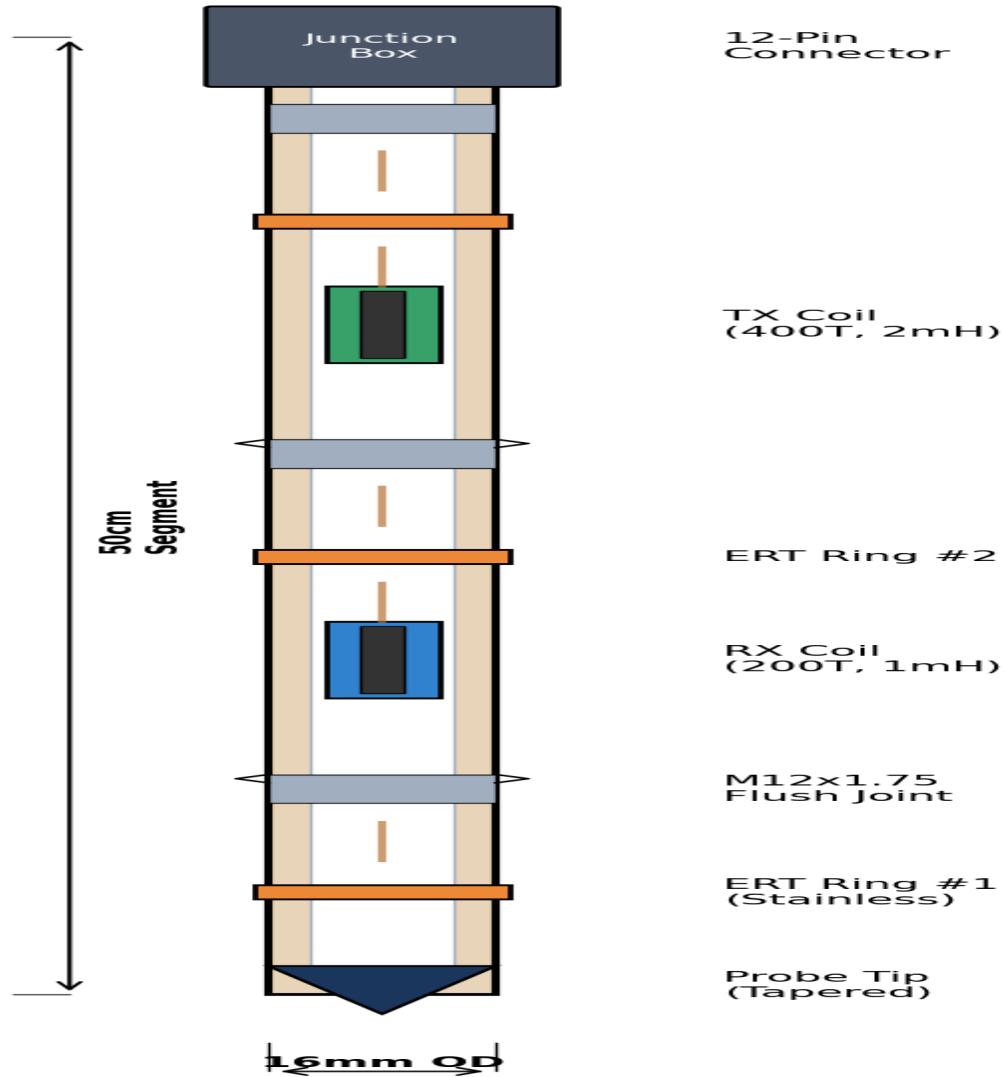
Detailed probe cross-section showing complete internal architecture. From bottom: tapered tip, ERT ring positions, RX coil with ferrite core, M12 threaded joints, TX coil assembly, and junction box connection. Standard 50cm segment shown.
